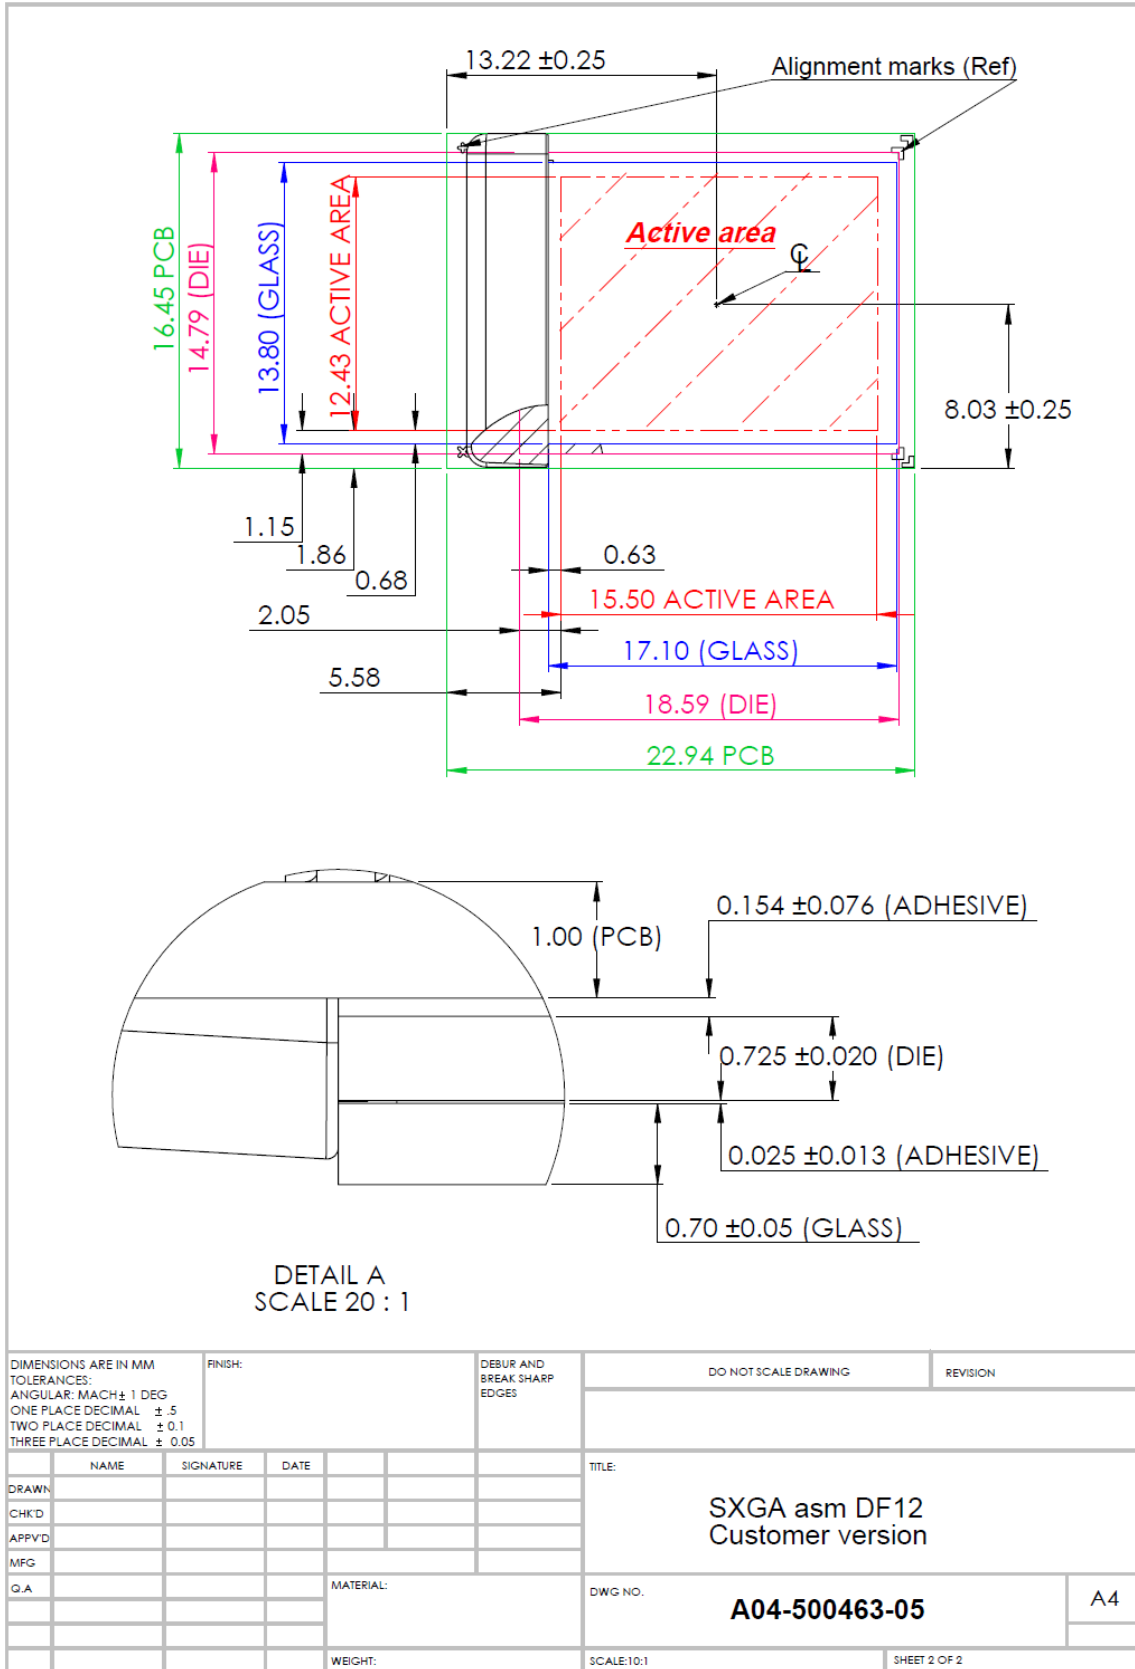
SXGA Assembly Drawing with 0.7mm Glass Cover (A04-500463-05)
